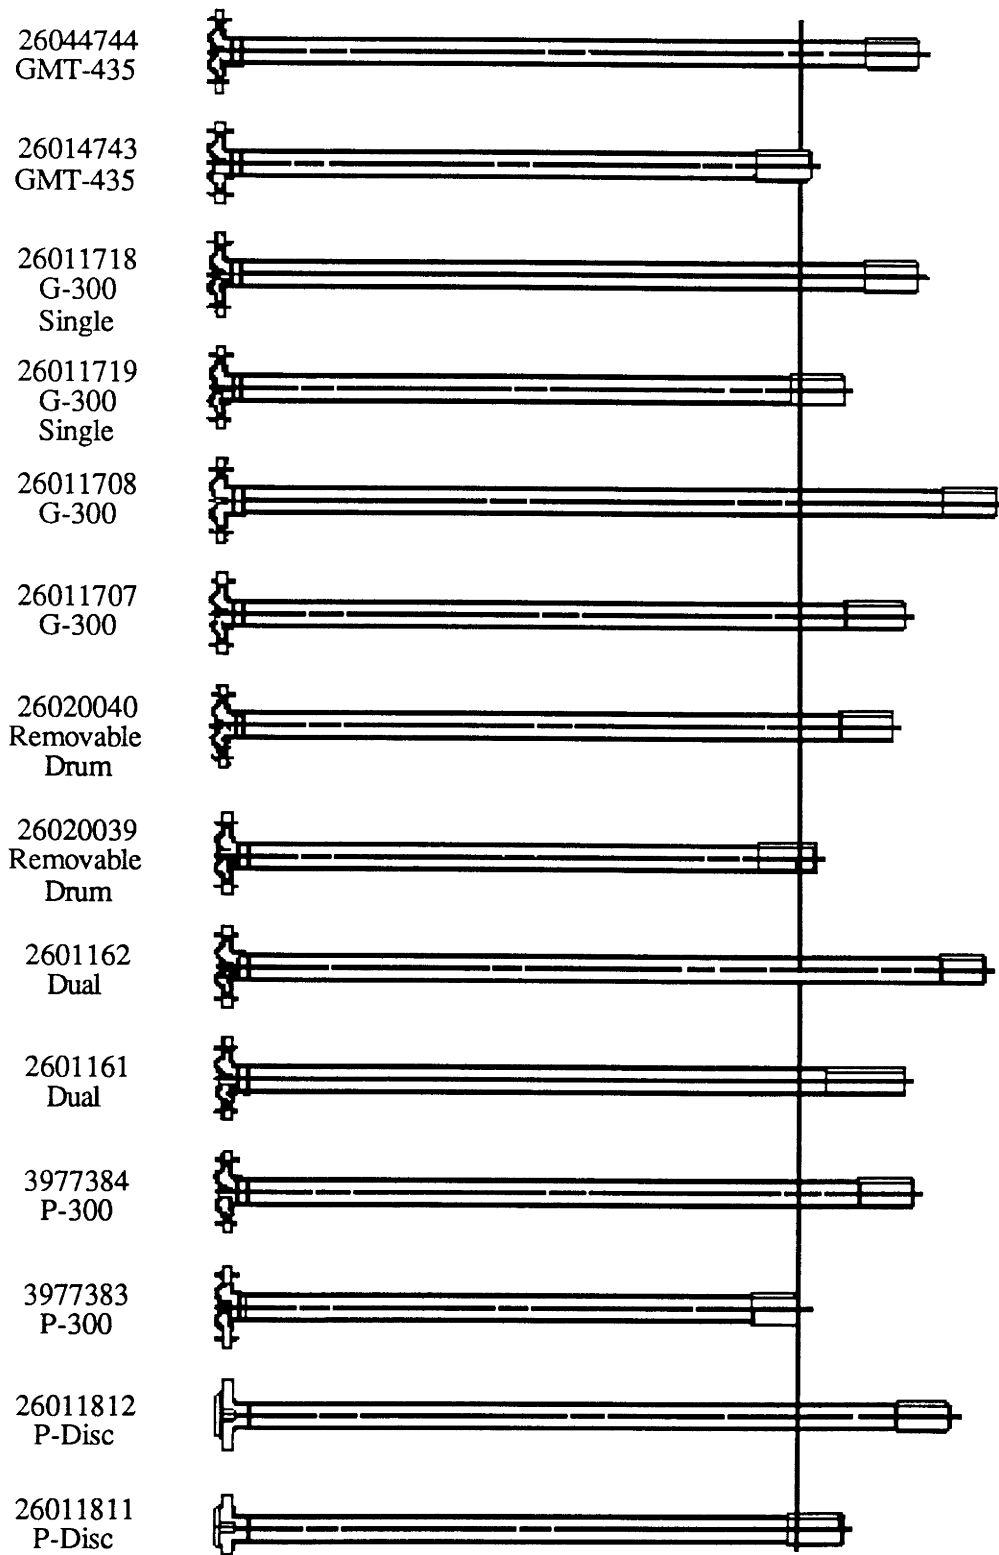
Current Axle Shaft Components on 10.5" Full-Size Pickup Truck Rear Axles
